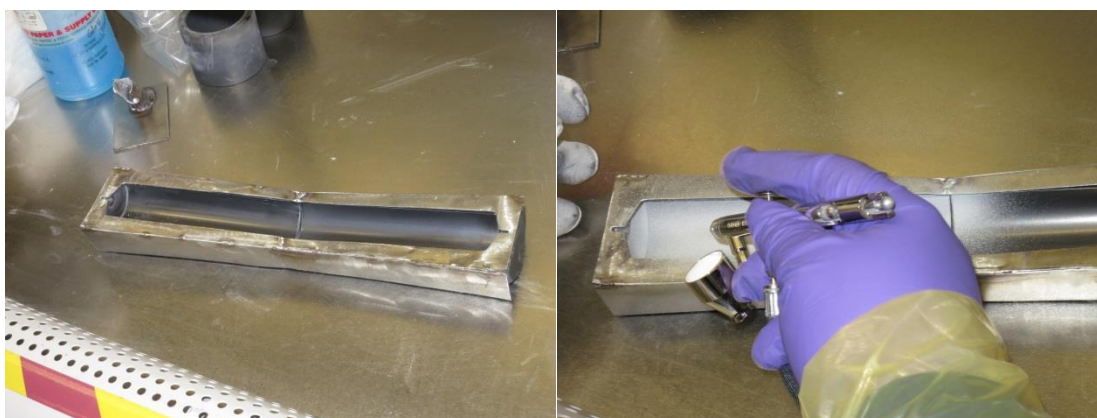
Heated mold in mold jig ready to be coated (left). Spraying yttria wash on heated mold piece (right).
